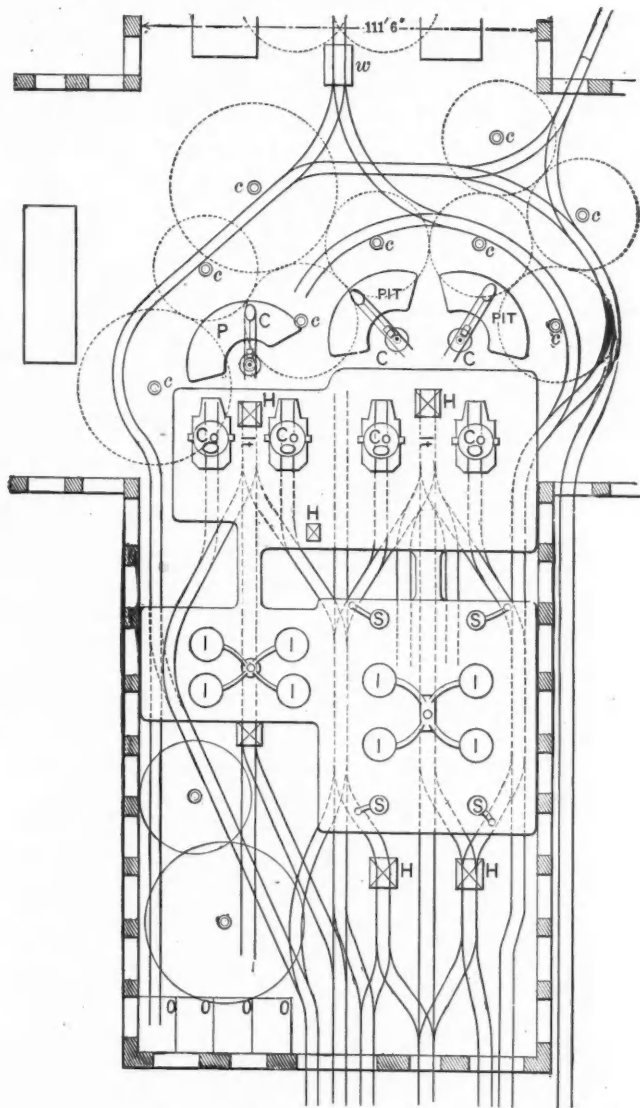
PLAN OF BETHLEHEM FOUR-TON PLANT.
